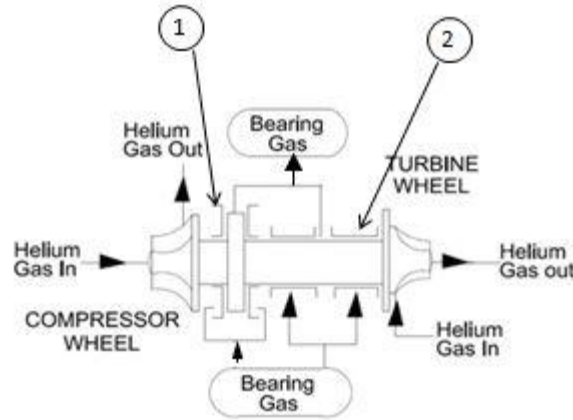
Gas flow path of Turbo-expander and Bearing system
